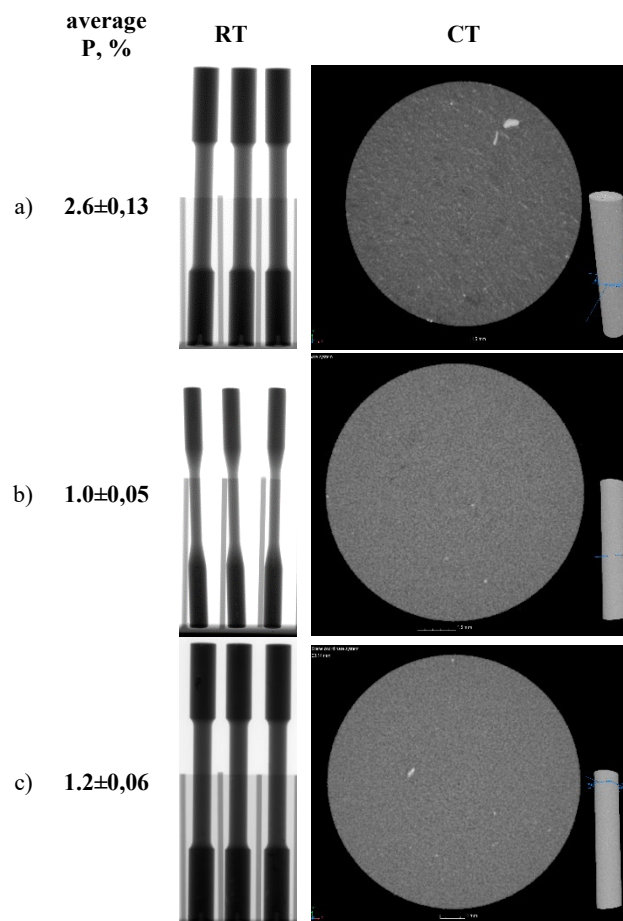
Non-Destructive Testing results of the WE43 alloy: a) ingots, b) HPDC castings, c) mold (steel mold) castings
